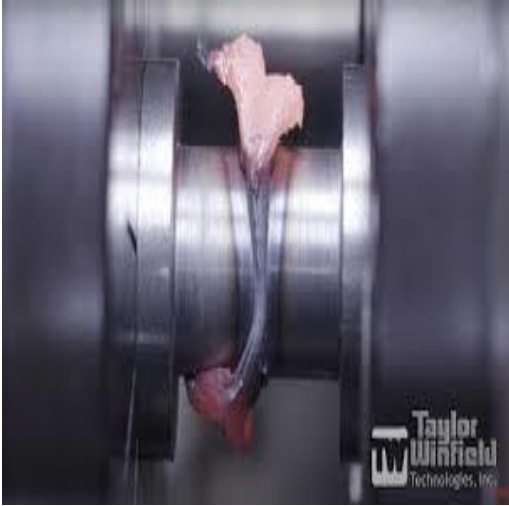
Solid-State welding Figure 1.15. Fusion welding
